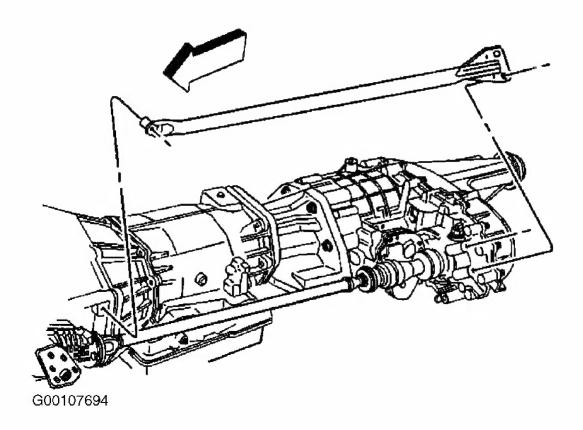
Removing Transfer Brace Courtesy of GENERAL MOTORS CORP.
